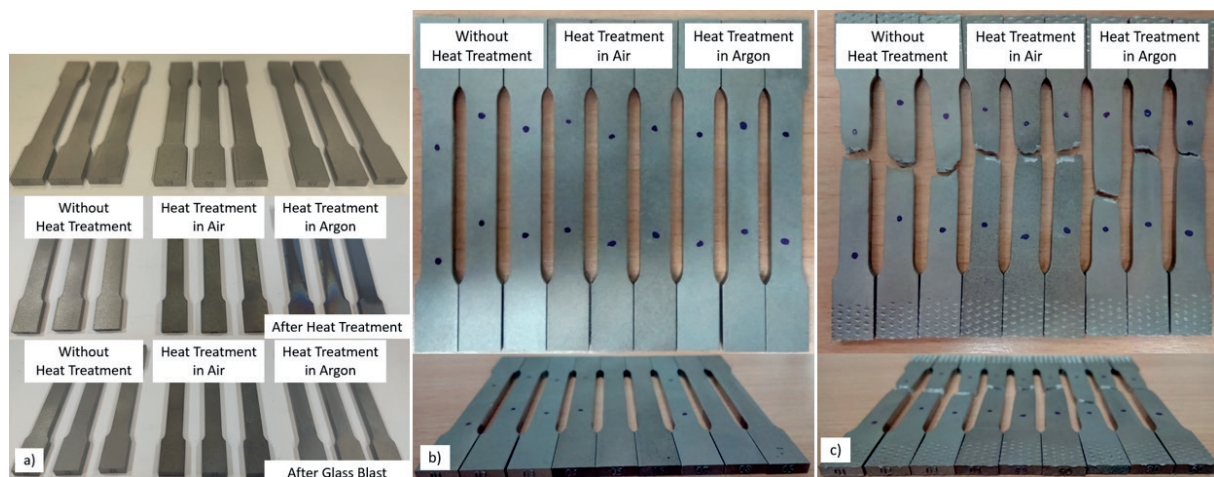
Ti-6Al-4V tensile test samples a) as manufactured, after the heat treatment, after the heat treatment and glass blasted, b) before the tensile test, c) after the tensile test
